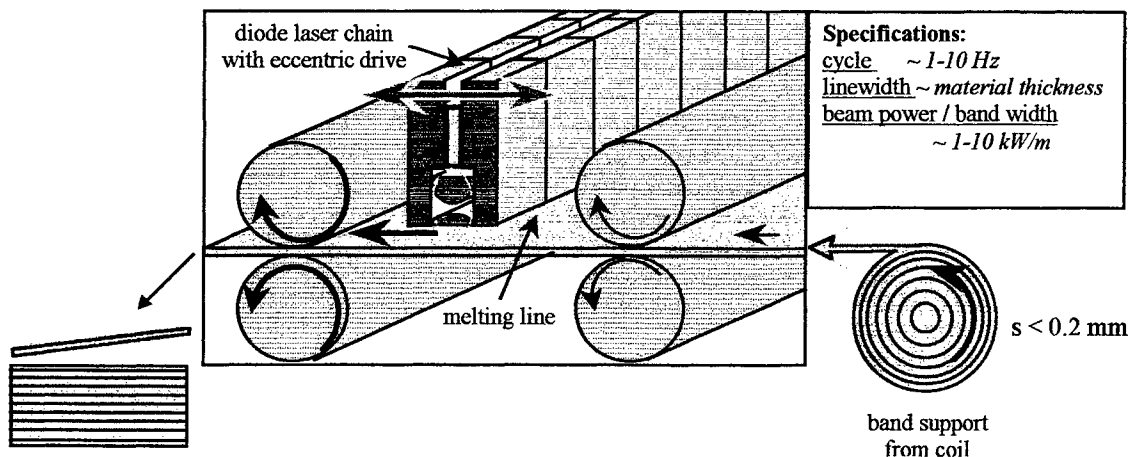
sketch of an eccentric cutter using a linear assembly of high power diode lasers
